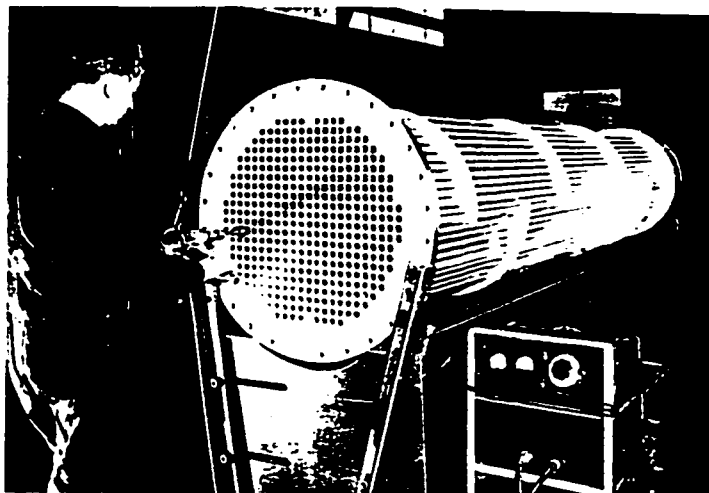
d: Tubes being rolled into tubesheet of shell-and-tube heat exchanger
